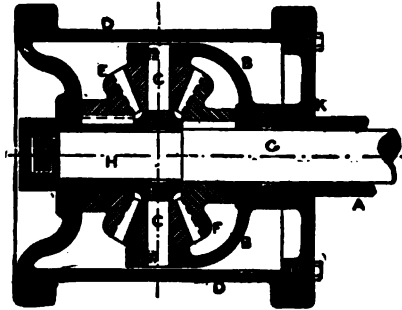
The Hub-Enclosed Differential of the Riker Carriages. A is the rotating sleeve carrying the drive spur. It is bolted to the yoke carrier, B, and the flange piece, K, as shown. C and C are the studs of the bevel pinions attached to the yoke carrier, B. F is the bevel gear wheel keyed to the rotating through axle shaft, G, whose opposite end is rigidly attached to the other hub. The bevel gear, E, is keyed to the in-flanged portion of the hub, D, turning on the reduced portion, H, of the rotating axle shaft.
